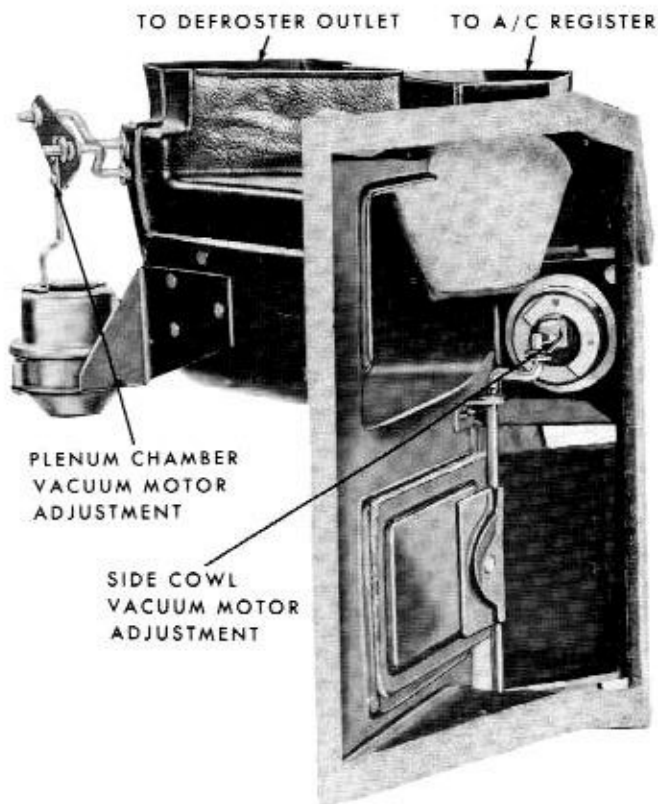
Left Side Cowl Duct and Plenum Chamber Vacuum Motor Adjustment—(60L-8824)
